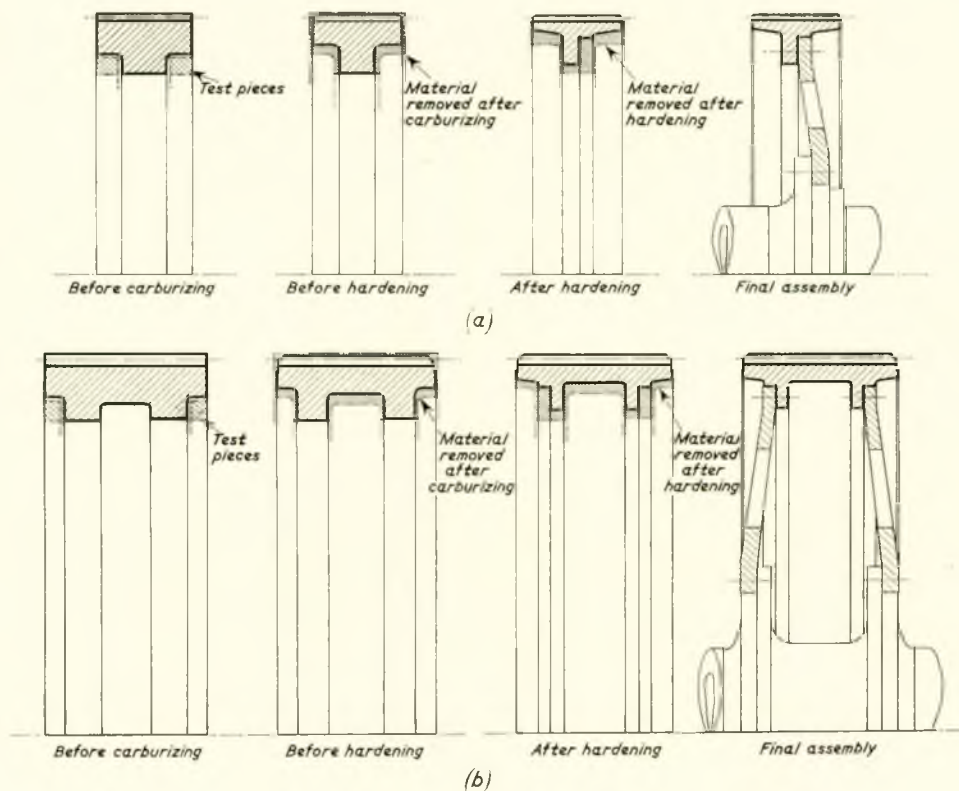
(a)—Primary reduction gear rim sections up to assembly
